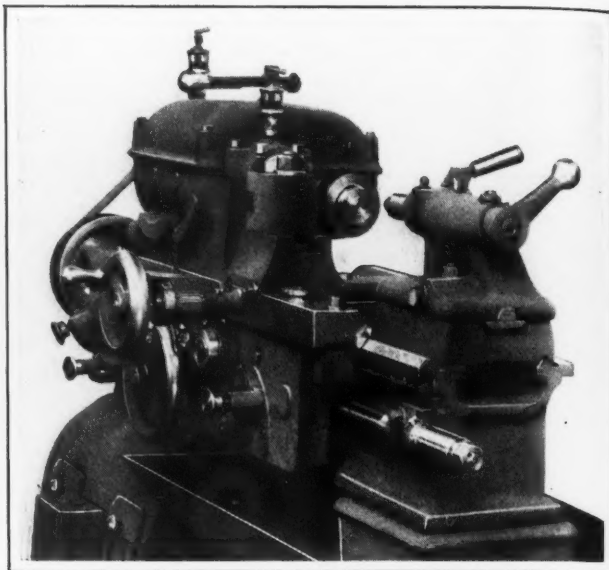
View Showing the Quick-acting Tailstock, Tool-block, Carriage, etc.
